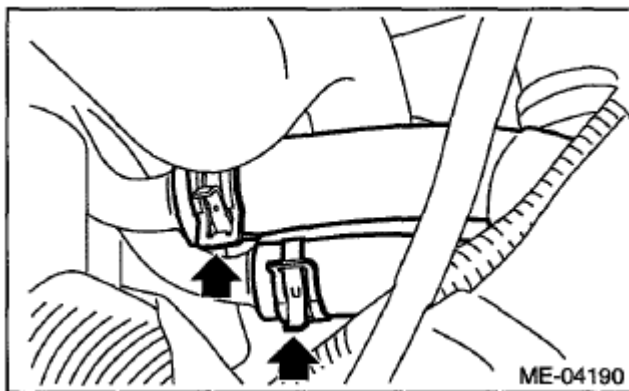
Locating Heater Inlet Hose And Heater Outlet Hose
